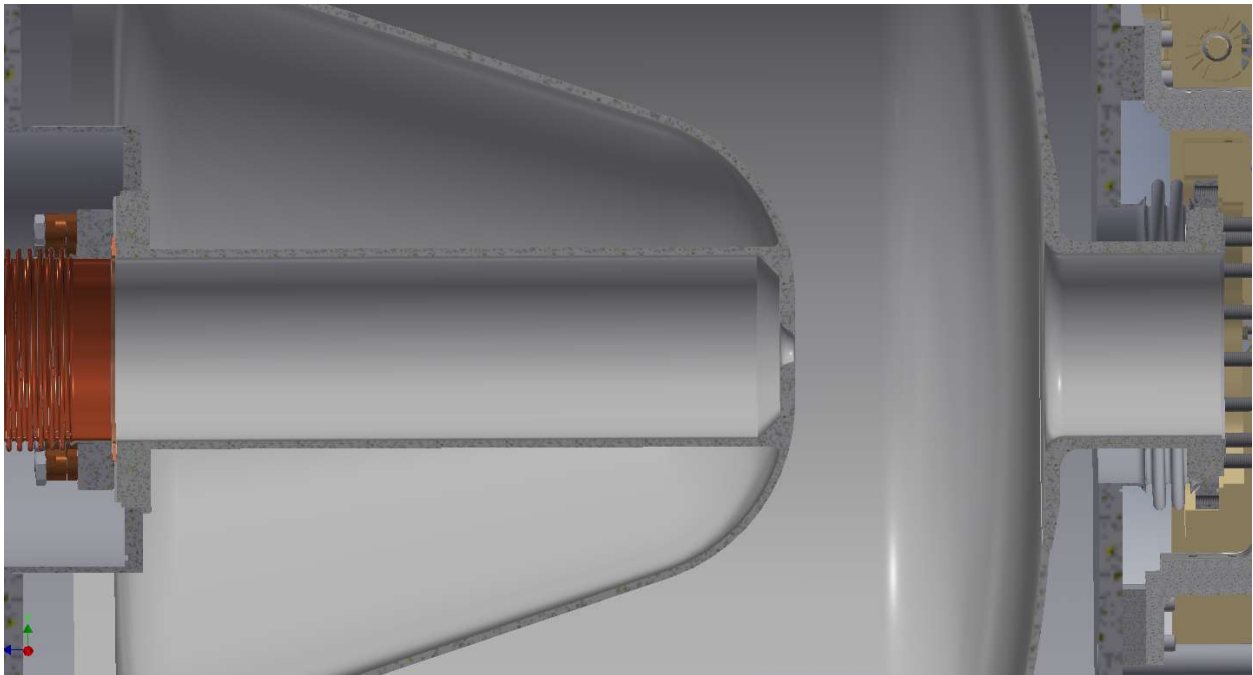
Section view showing how the WIFEL cavity is supported internally. Cathode side is rigidly supported by the helium jacket while the beamport side is supported by the mechanical tuner assembly. We must be able to orient the cavity in any direction to clean it, but the mechanical tuner only provided vertical support. Brackets were installed temporarily to provide direct support from the jacket to the cavity flange. The cavity was then rotated vertically so that the cavity was entirely supported by the cathode side/cavity jacket and therefore the beamport side support and the entire tuner could then be removed as shown in Figure 65. Additional brackets also shown in Figure 65 were installed for support during the cleaning process.
